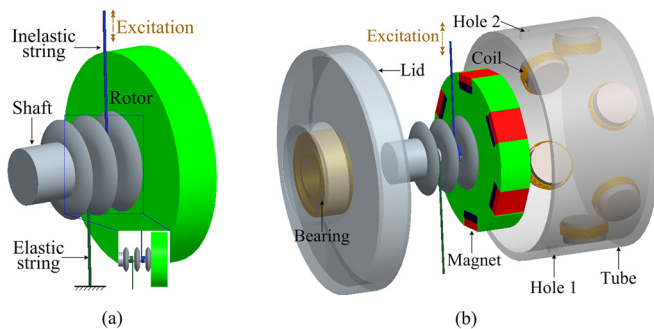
(a) String-driven rotor; (b) electromagnetic REH with the string-driven rotor.
